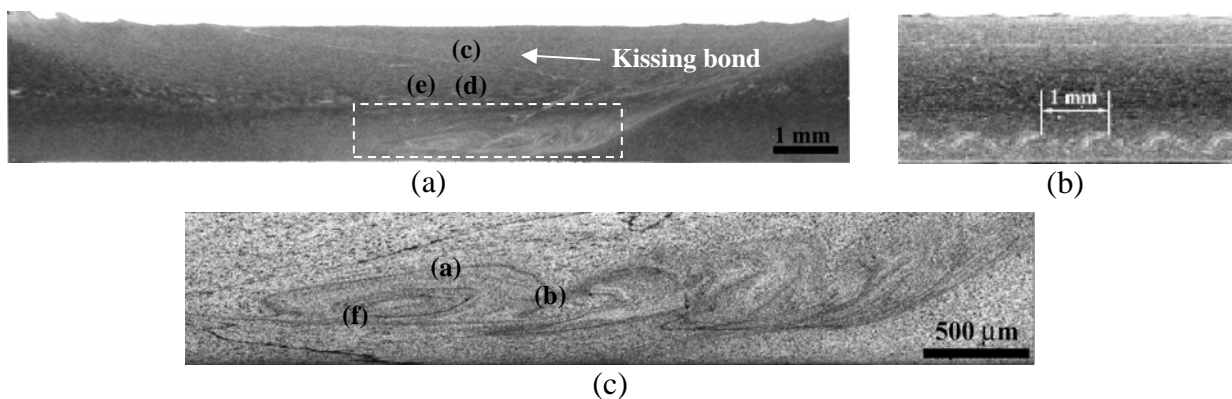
Macrographs for the CC1 weld etched in Keller's reagent showing (a) the weld face, (b) longitudinal section along the weld centreline, (c) magnified view of the dashed box in (a)
